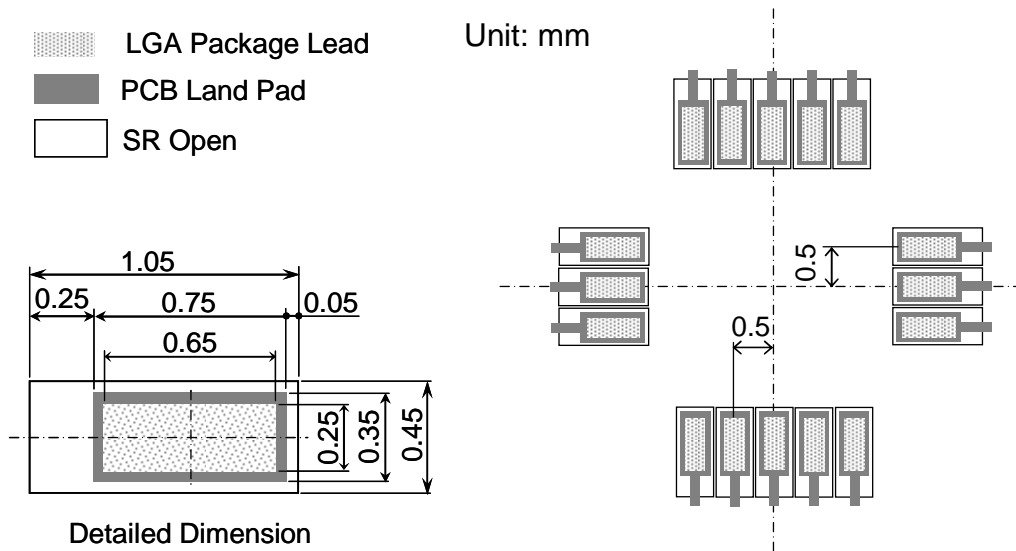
Layout Recommendation for PCB Land Pad and SR Open
